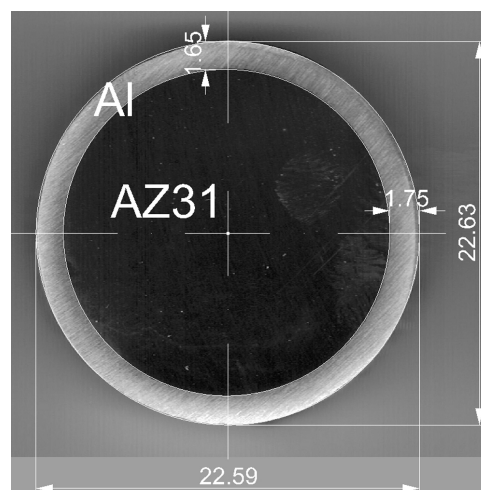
A sample shape (cross-section) of Mg/Al bimetallic stock after explosive welding
